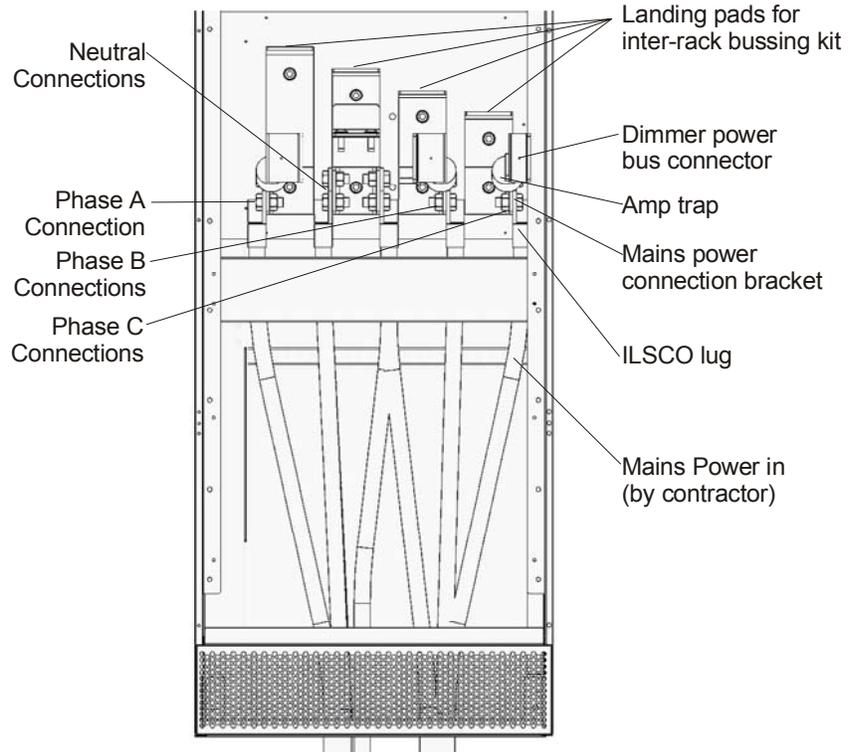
Bus Bar Connections Behind Processor Assembly (Bottom entry shown)
